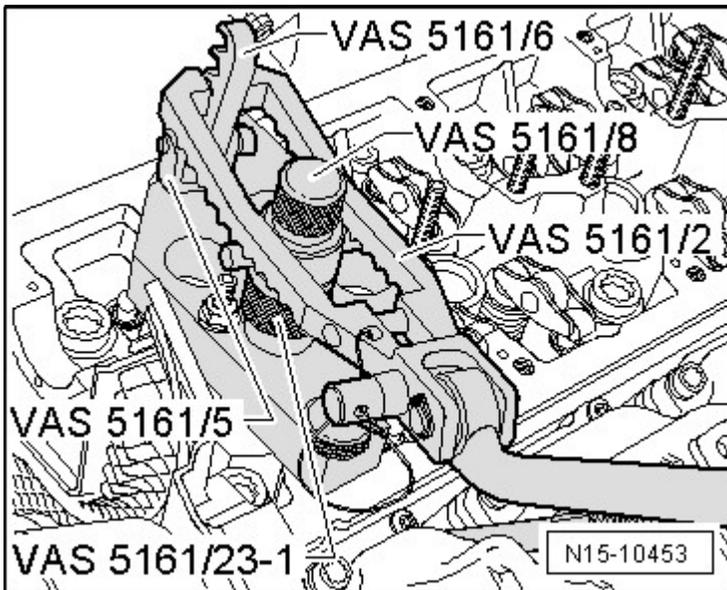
Identifying Assembly Cartridges VAS 5161/2, Valve Insertion Device VAS 5161/8 And Guide Plate VAS 5161/23
